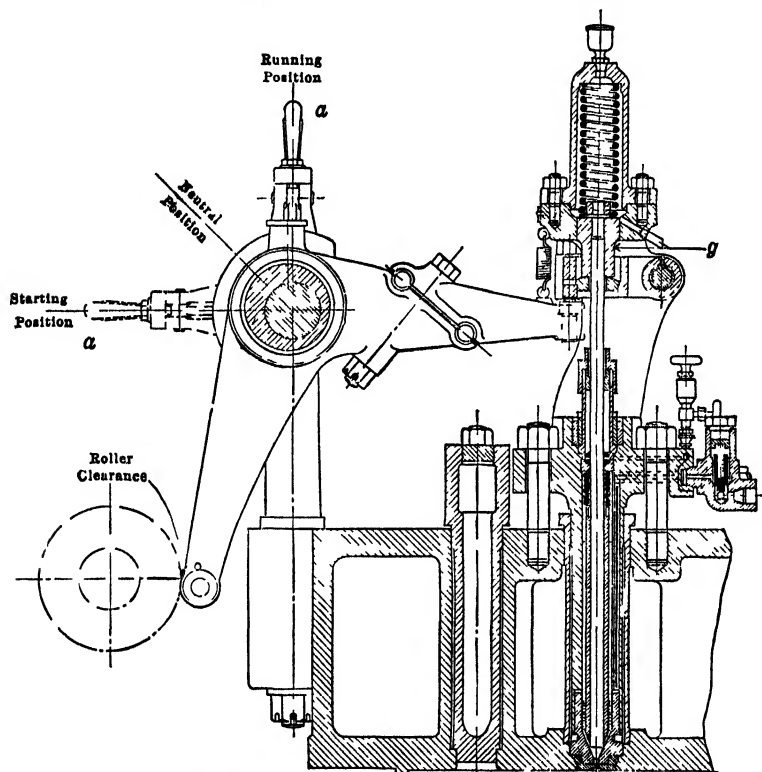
Fuel-valve arrangement of the Busch-Sulzer Type B Diesel.
